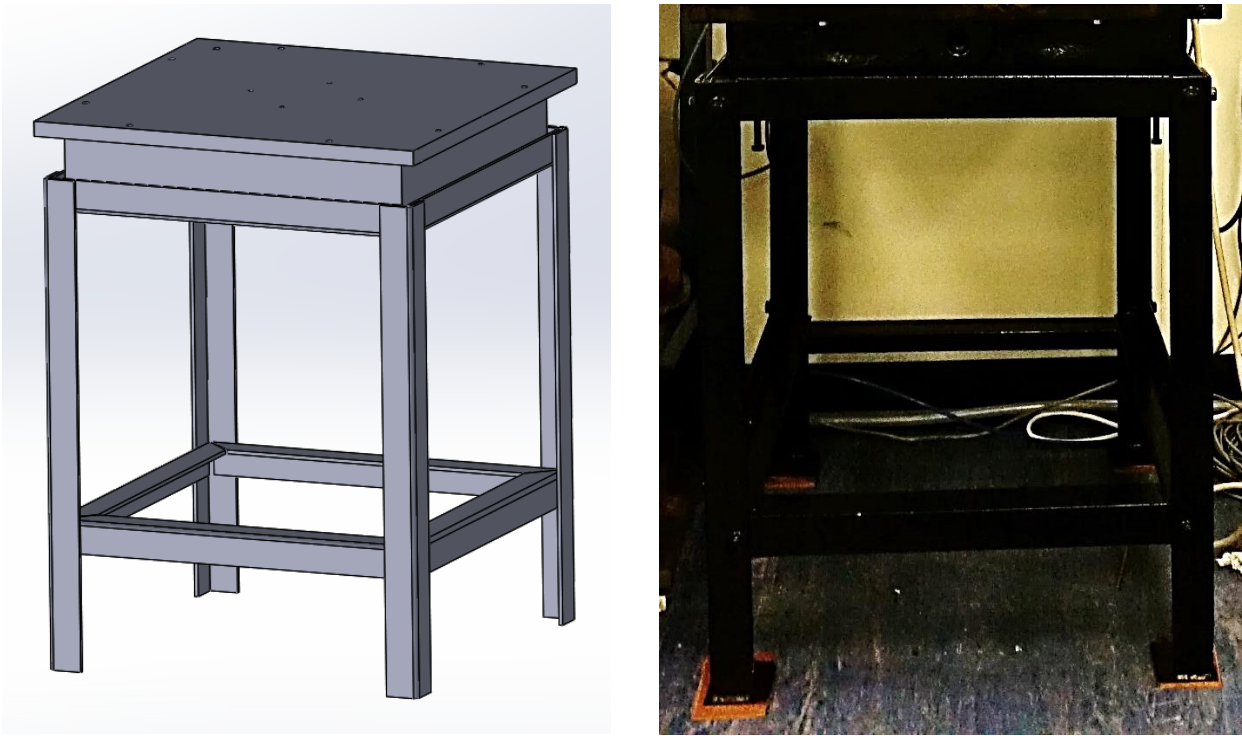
Polishing machine base table (left: CAD model and right: Actual table)
